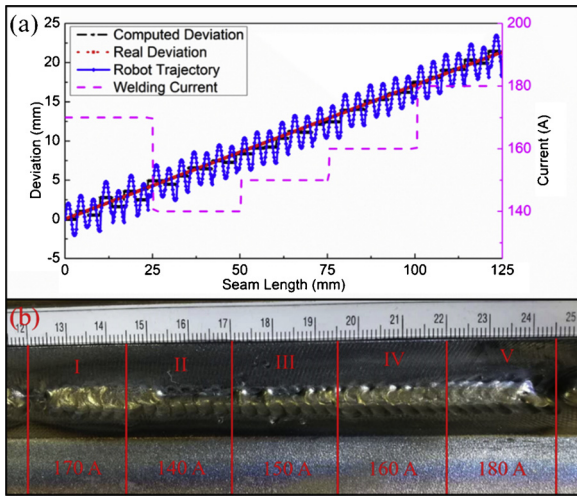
Robotic welding (a) robot trajectory (b) welded workpiece.
